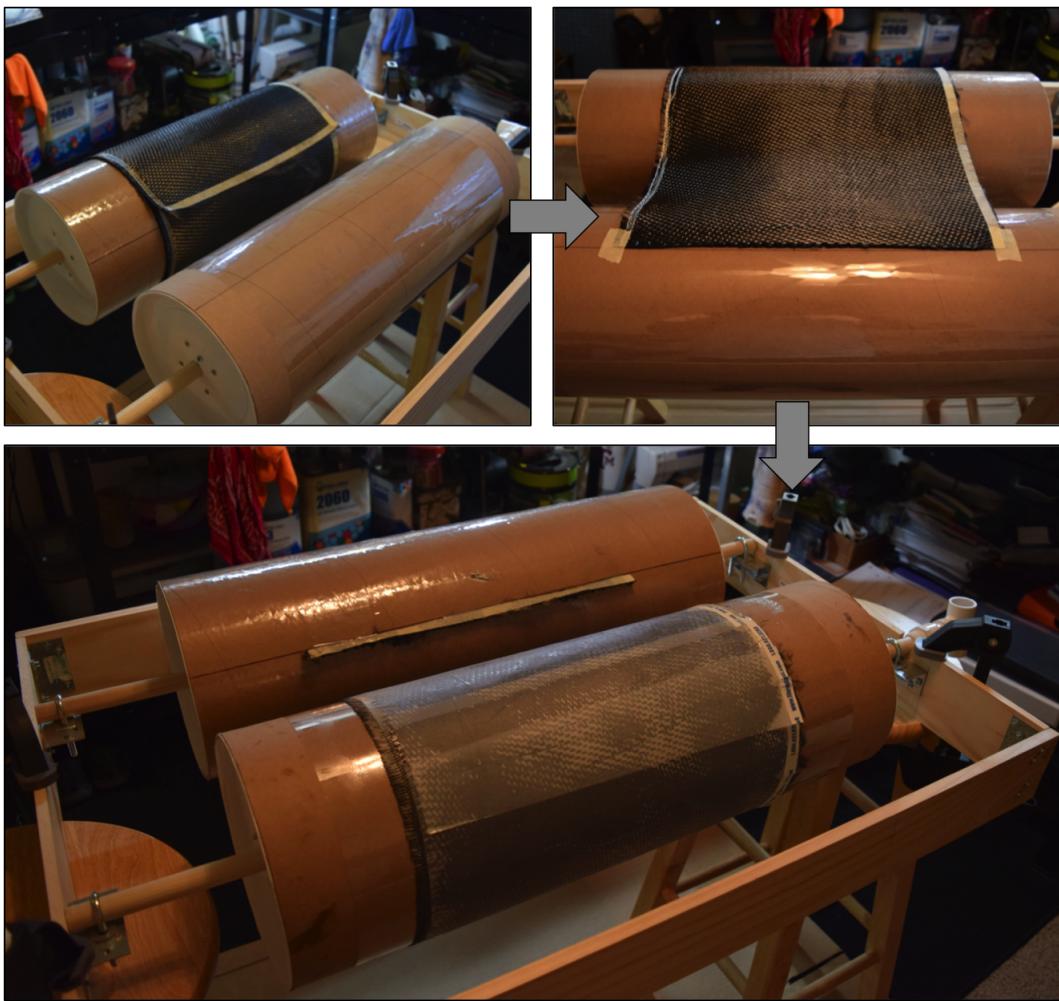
Body tube manufacturing process, dry fabric on spool - wrap/soak fabric on mandrel - peel ply application
